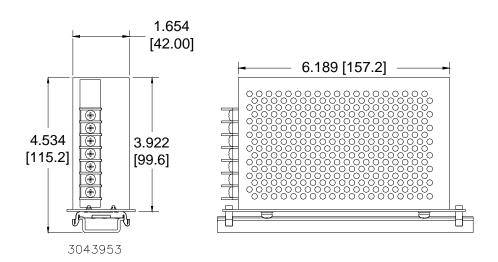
POWER SUPPLY WITH KIT INSTALLED, OUTLINE DIMENSIONS
